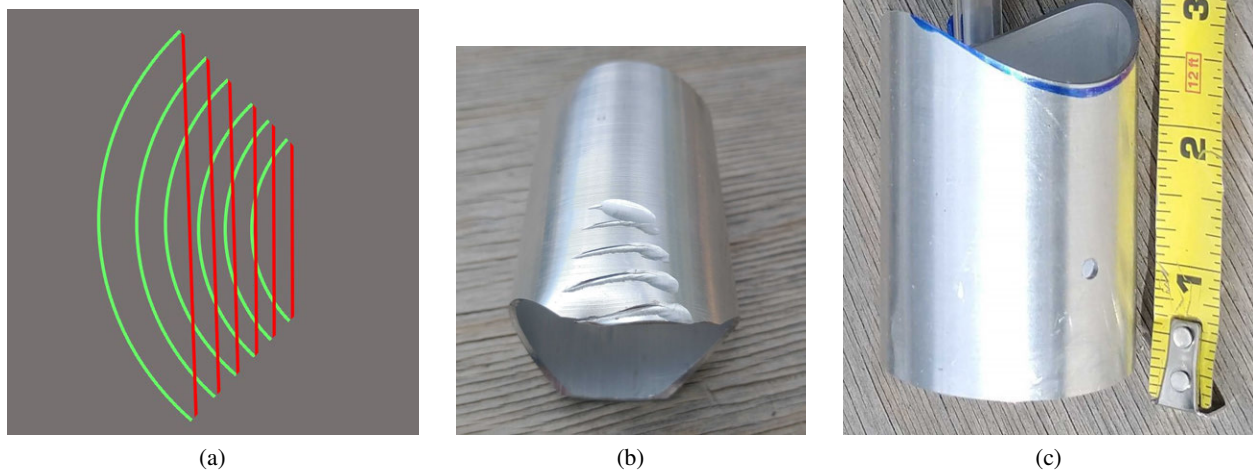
Mill path viewed from above (a), Damaged tube 1 (b), Successful part (c)
